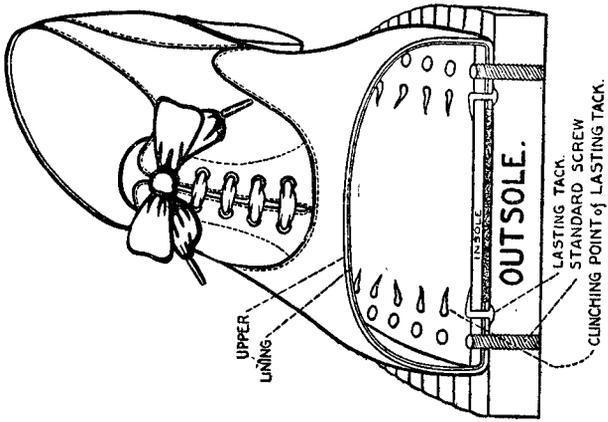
CROSS SECTION OF A STANDARD SCREWED SHOE.
